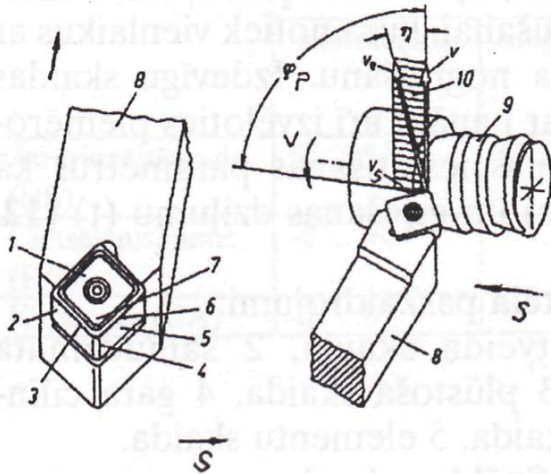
Cutting tool (1 - cutting insert, 2 – secondary plane, 3 - auxiliary cutting edge, 4 - cutting edge nose, 5 - main back surface, 6 - main cutting edge, 7 - chip breaker, 8 - cutting insert holder, 9- machined part, 10 - work plane, v - cutting speed, v_e - effective cutting speed, ϕ_p – feeding movement angle, η - machining speed angle).
